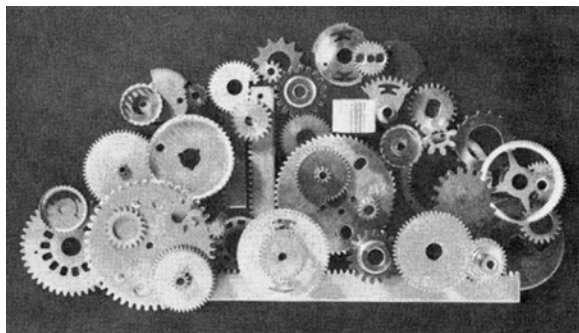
Assortment of gears used in small mechanisms. (Courtesy of Winzeler Manufacturing and Tool Co., Chicago, Illinois.)
